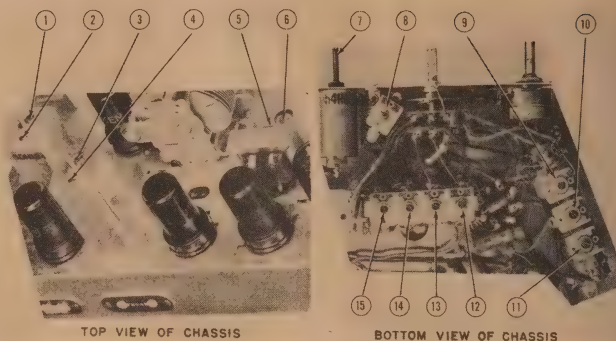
Top and bottom views of the receiver locating slugs, padders and trimmers for alignment purposes.
